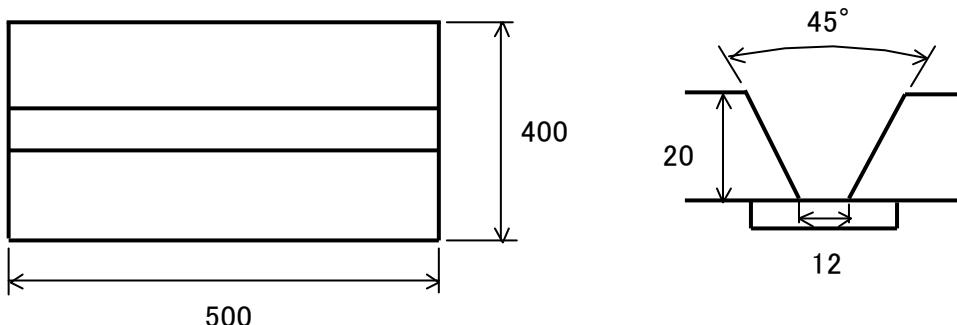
Test plate and groove geometry (steel grade: SM490B)
